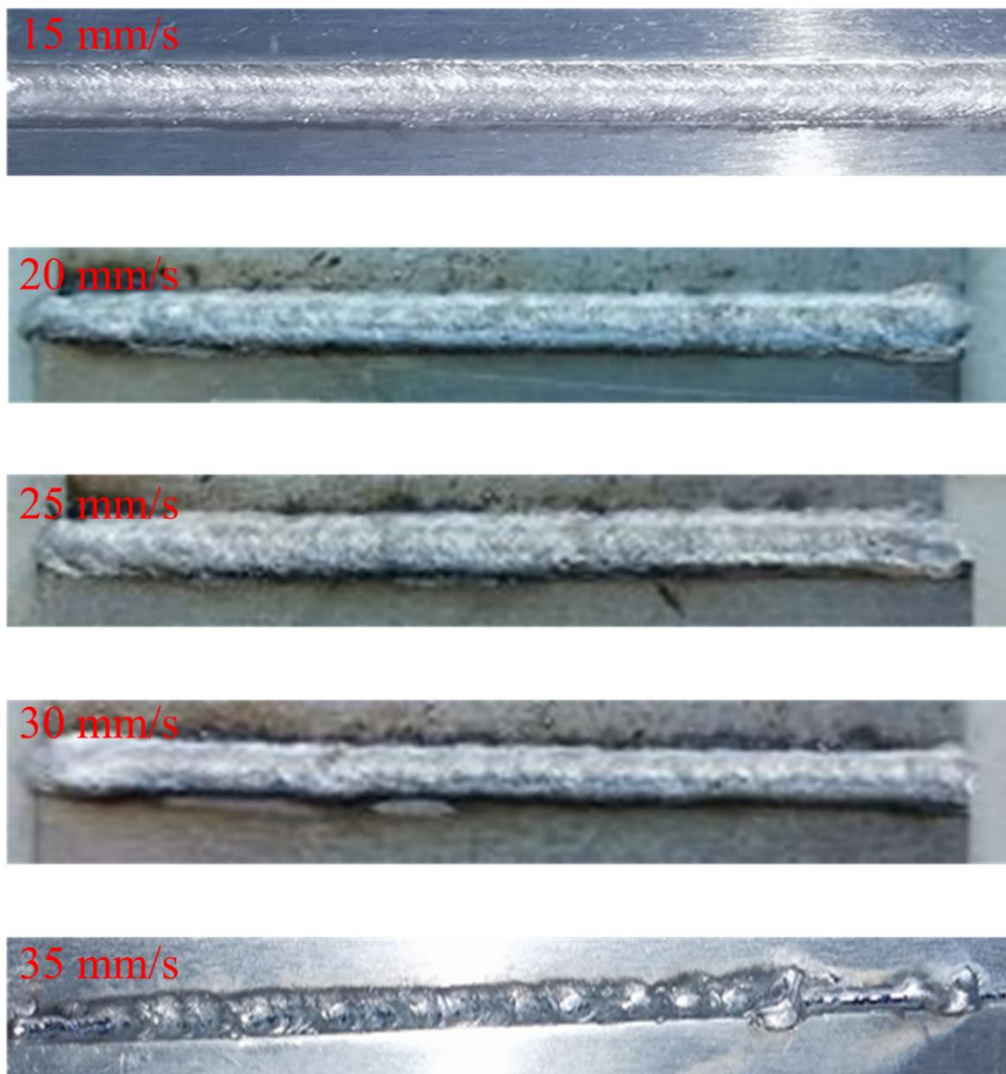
Influence of welding speed on weld surface morphology: (a) 15 mm/s; (b) 20 mm/s; (c) 25 mm/s; (d) 30 mm/s; (e) 35 mm/s.
